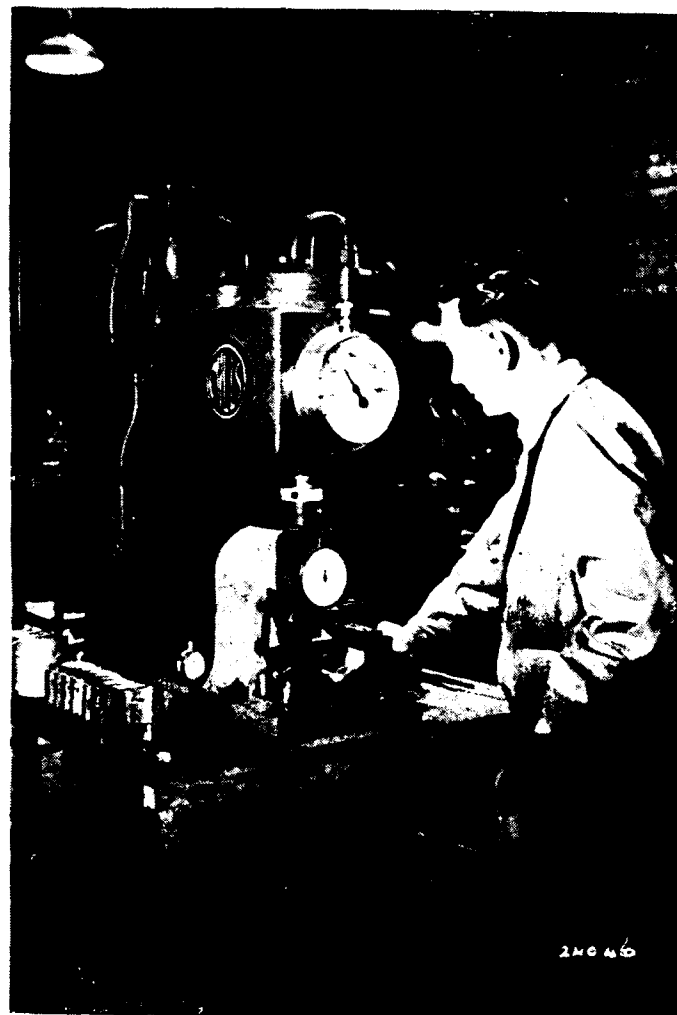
A bench type Mills "Oilaulic" Press used for applying a set load to check the periphery length of half bearings.
